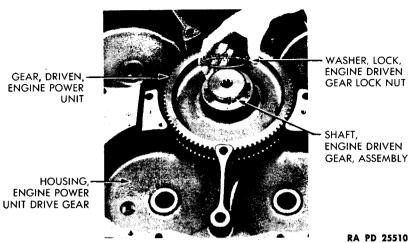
Placing Engine Driven Gear Lock Nut Lock Washer In Position
